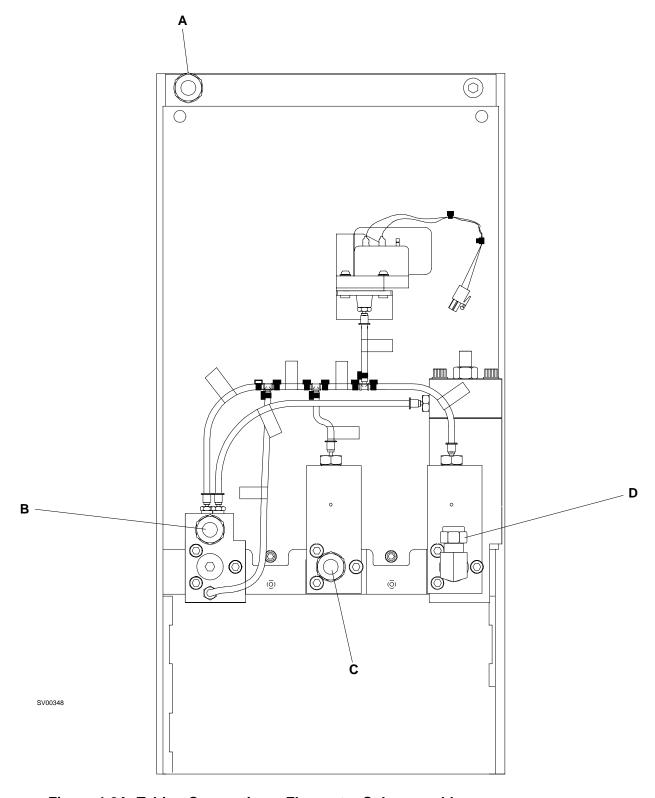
A. Tubing Connections: Flowmeter Sub-assembly
